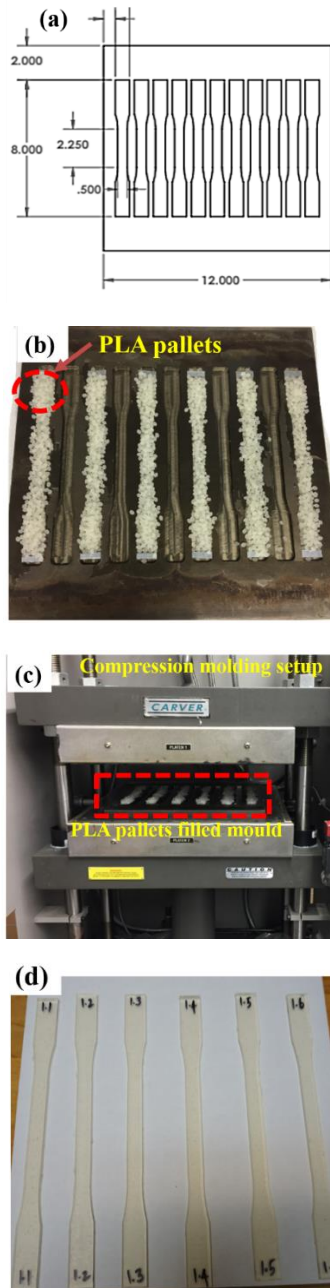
Fabrication setup: (a) CAD model of the mold (in.); (b) physical mold filled with metal tabs and filled with PLA pellets; (c) compression molding machine; and (d) PLA specimens fabricated by CM.
